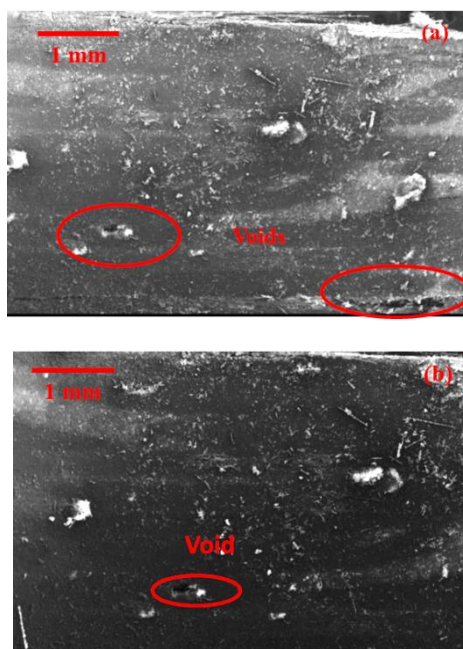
SEM images of the drilled hole at spindle speed 1200 rpm, 20 mm/min, 118°, and 8 mm for (a) HSS and (b) solid carbide during drilling of BD CFRP composite
